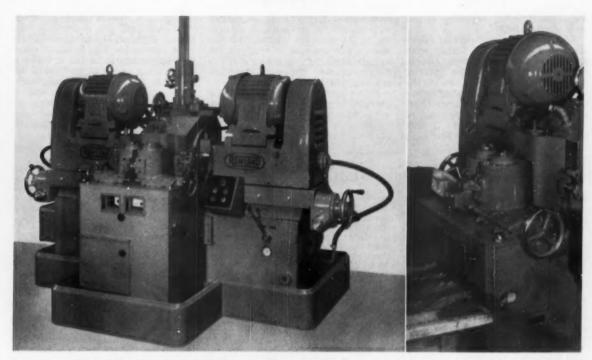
Rowland 'through-feed' duplex surface grinding machine
